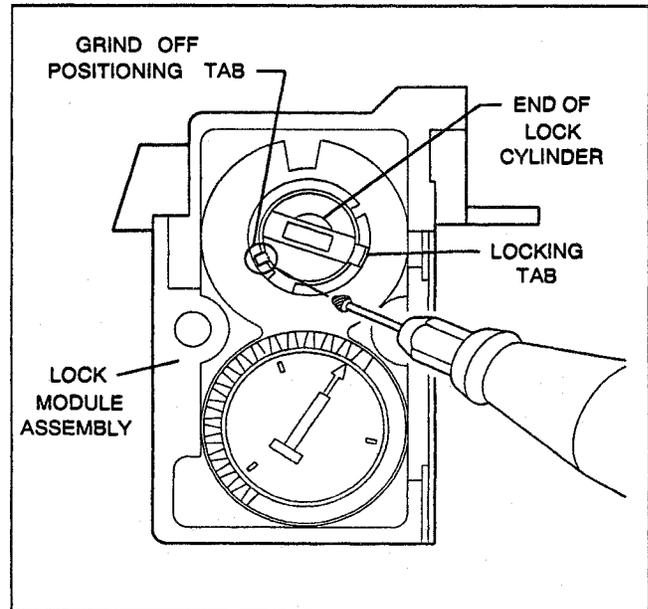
Grinding Off Lock Cylinder Positioning Tab
